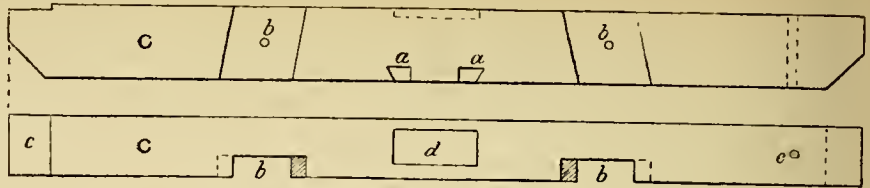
CROSS-PIECES FOR UPPER ENDS OF LEGS.
